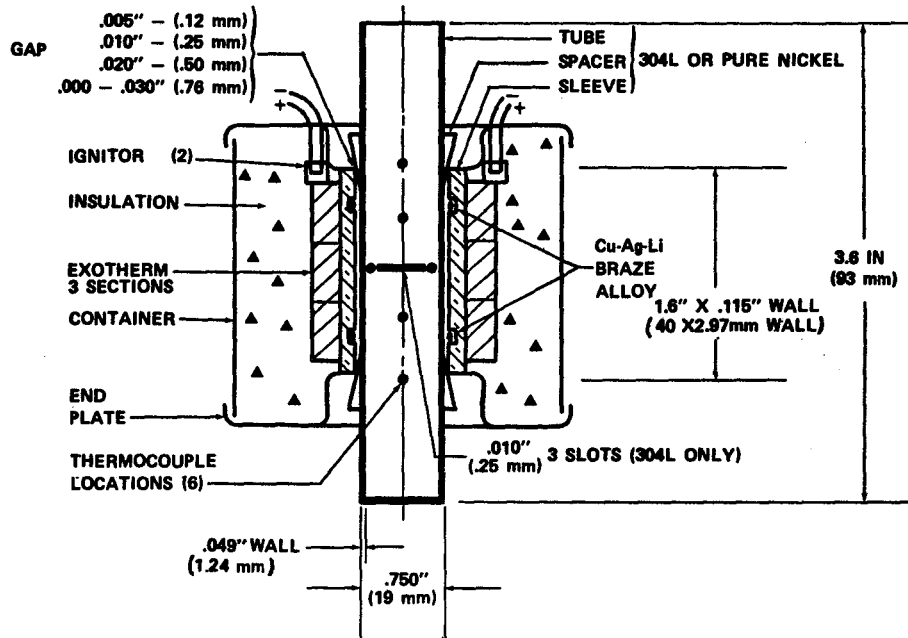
CROSS SECTION - TUBE AND SLEEVE ASSEMBLY IN BRAZING CONTAINER
